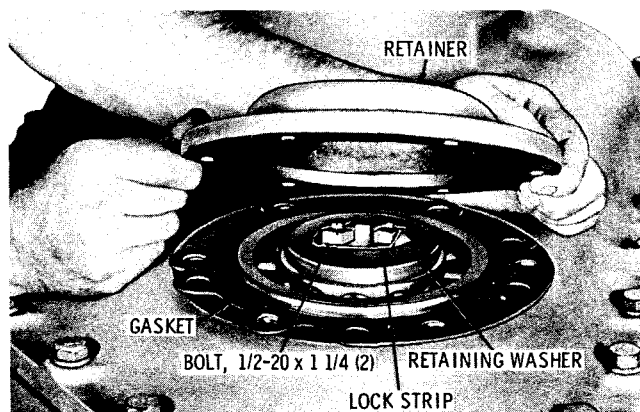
Installing rear bearing retainer (models with only front output)
